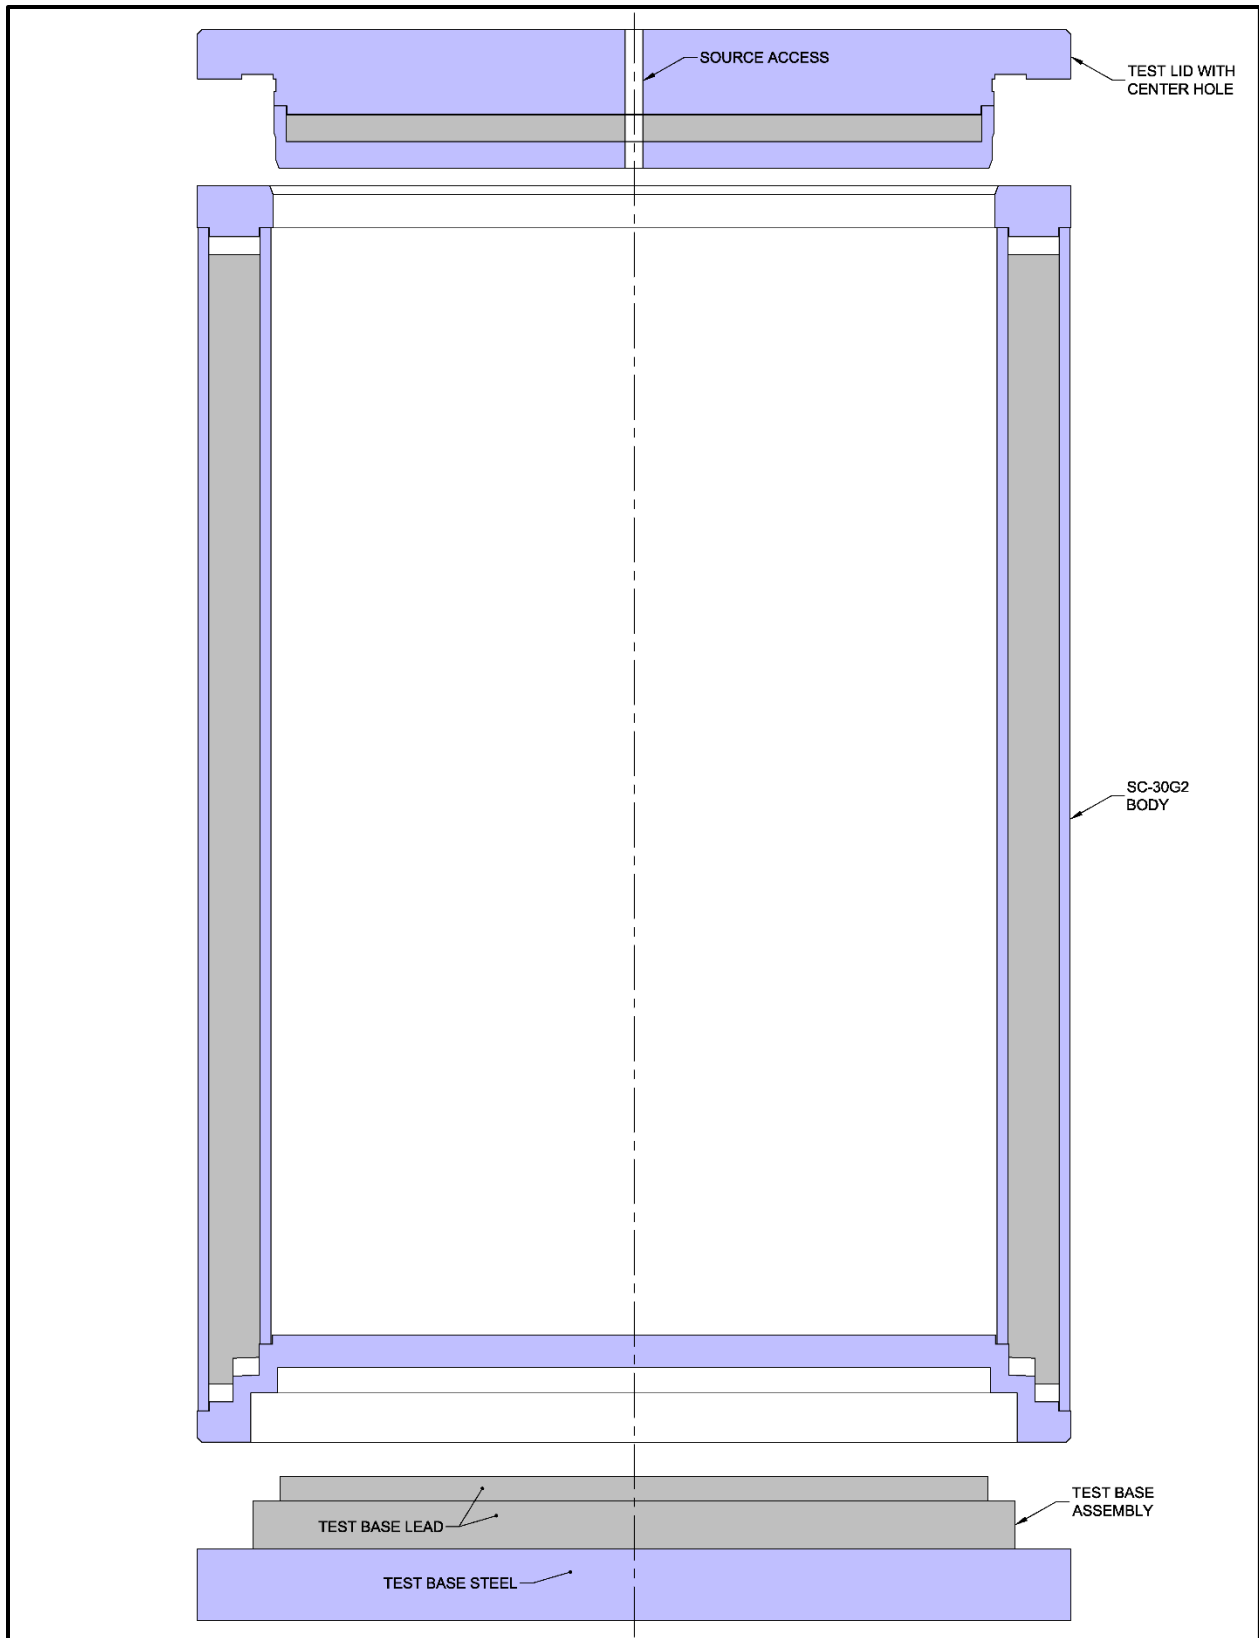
SC-30G2 Gamma Scan Test Assembly Exploded View
